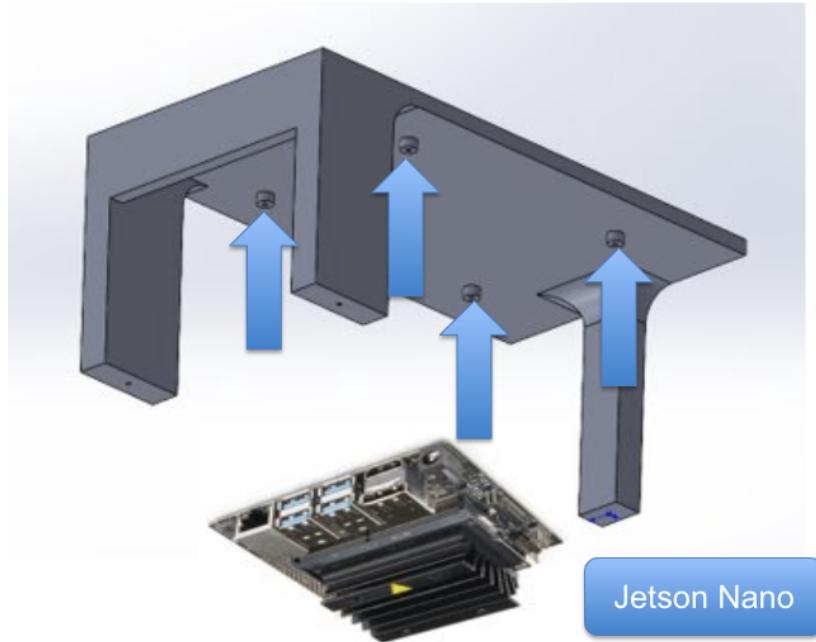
Assembly of the Jetson Nano to the Chassis
